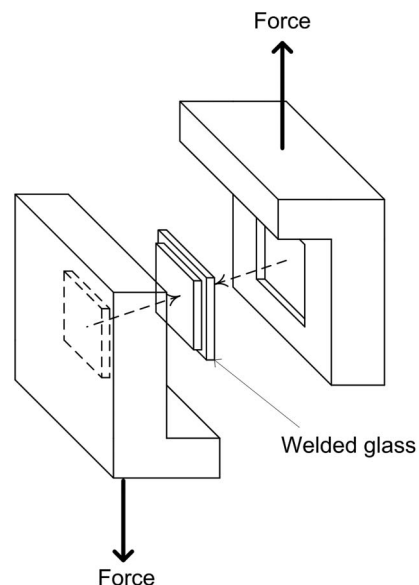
Exploded view of shear break testing rig. Two differentially sized pieces of glass fit into machined recesses in an aluminum block. The block is loosely held with sliding bolts (not shown) and pulled apart along an axis normal to the weld plane.
